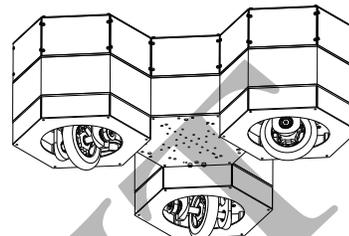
Three-wheel omnidirectional robot - concept drawing
